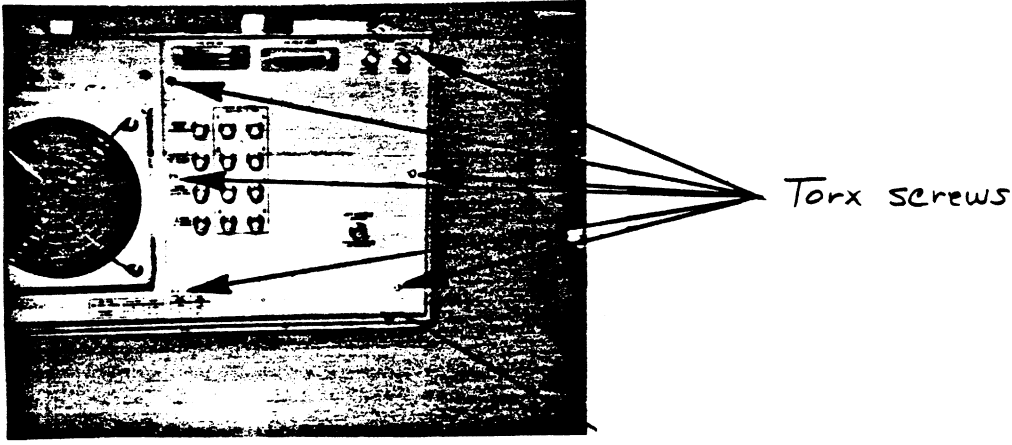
Location of Rear Panel Plate mounting screws.
